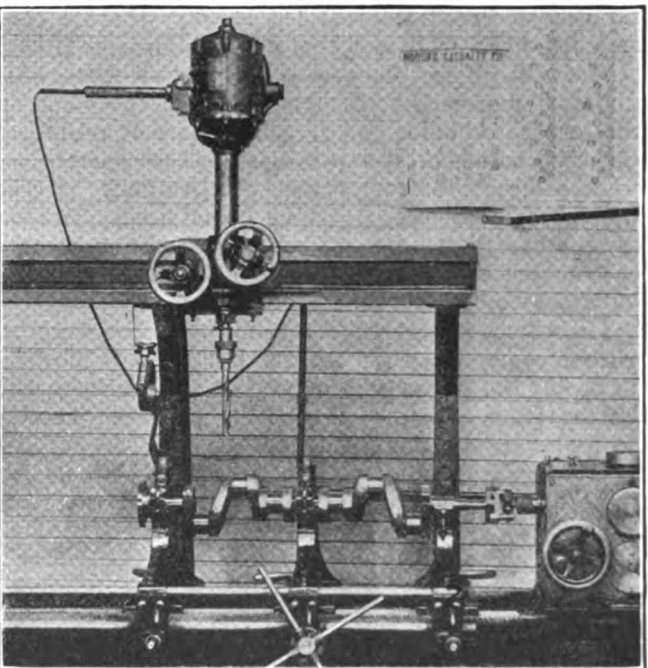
BALANCING LEXINGTON CRANKSHAFT
